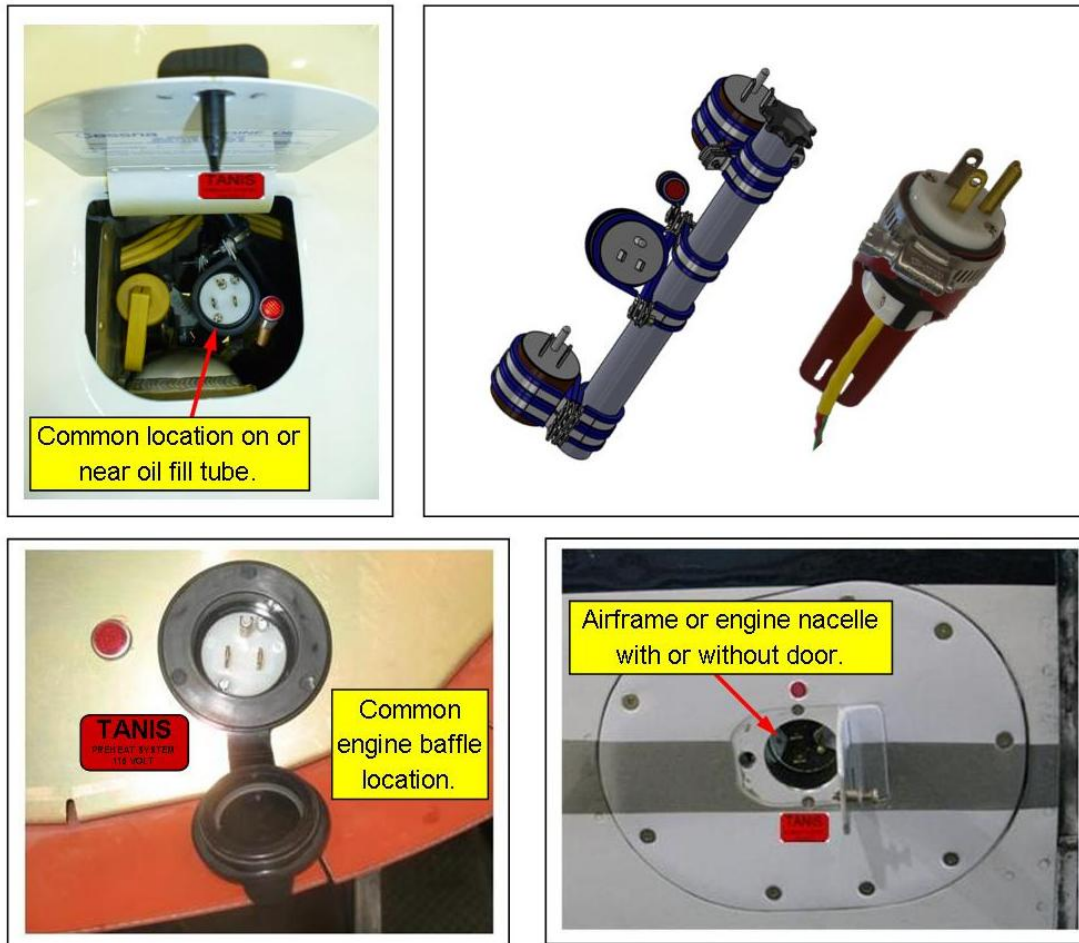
Examples of plug mounting. Top two pictures depict shore plug supplied with kit, bottom two pictures optional flush plugs configurations.
